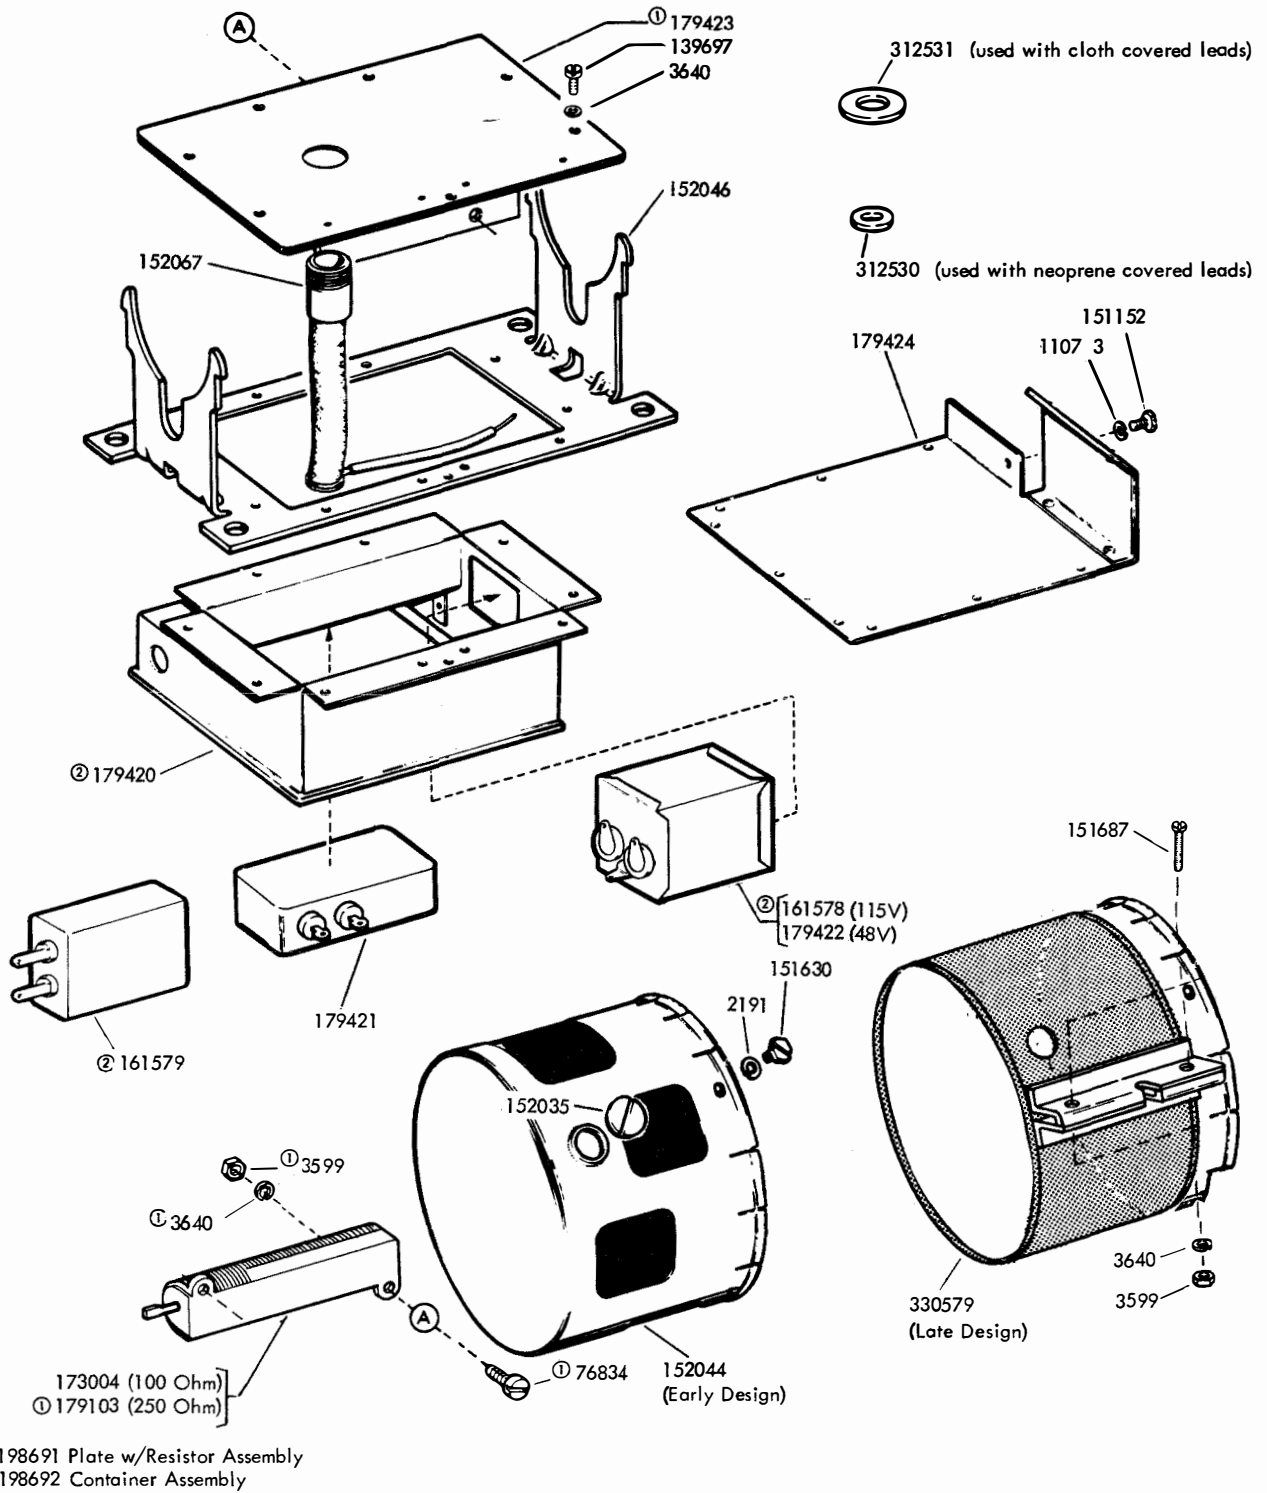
SERIES MOTOR MOUNTING PARTS WITH RF SUPPRESSION
